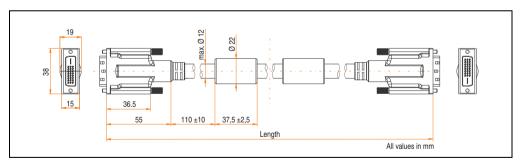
Dimensions - SDL flex cable 5CASDL.0xxx-03
